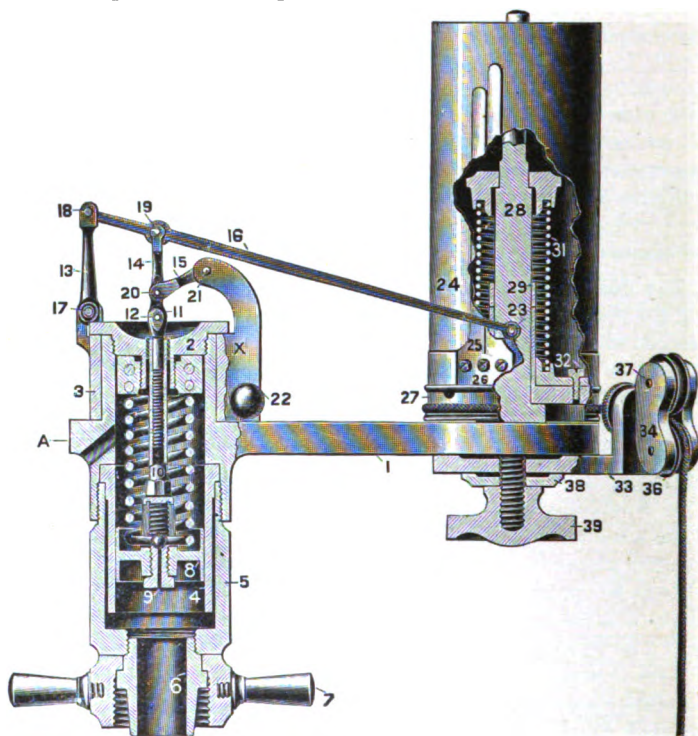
Art. 484. — Crosby Steam Engine Indicator.
